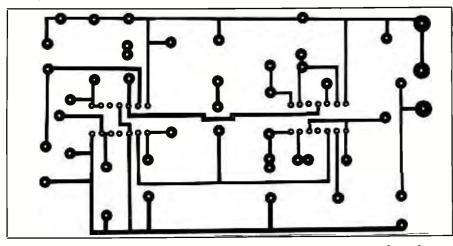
Actual-size etching-and-drilling guide for making pc board.
